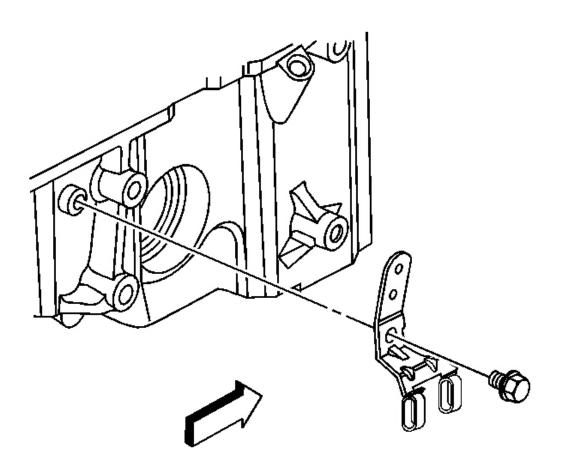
View Of Transmission Cover Bolt Courtesy of GENERAL MOTORS CORP.
